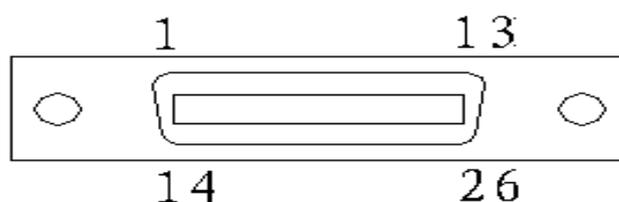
Soldering terminal of the XS2 spindle encoder (looking from the soldering terminal)
